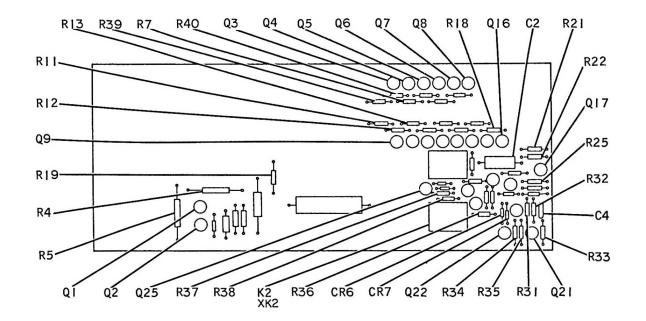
Lampdriver Board A9A1 (Sheet 2 of 2).
